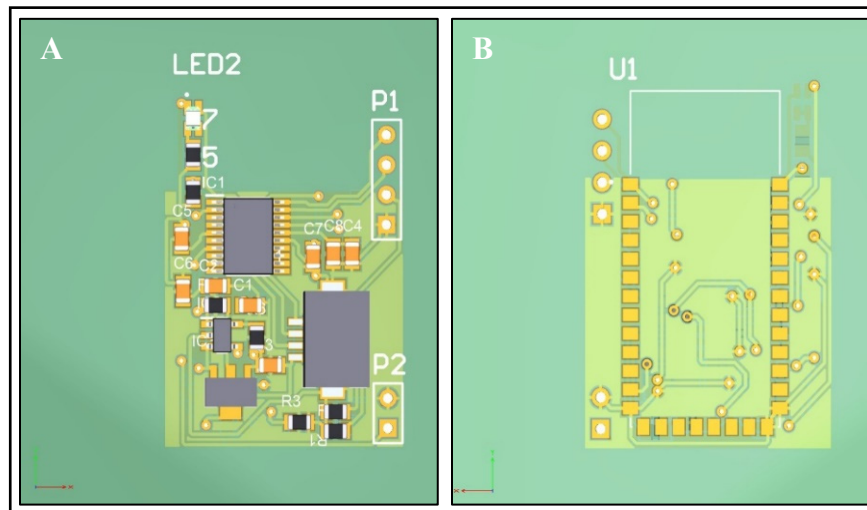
PCB layout of the Prototype WWD: (A) front, (B) back
